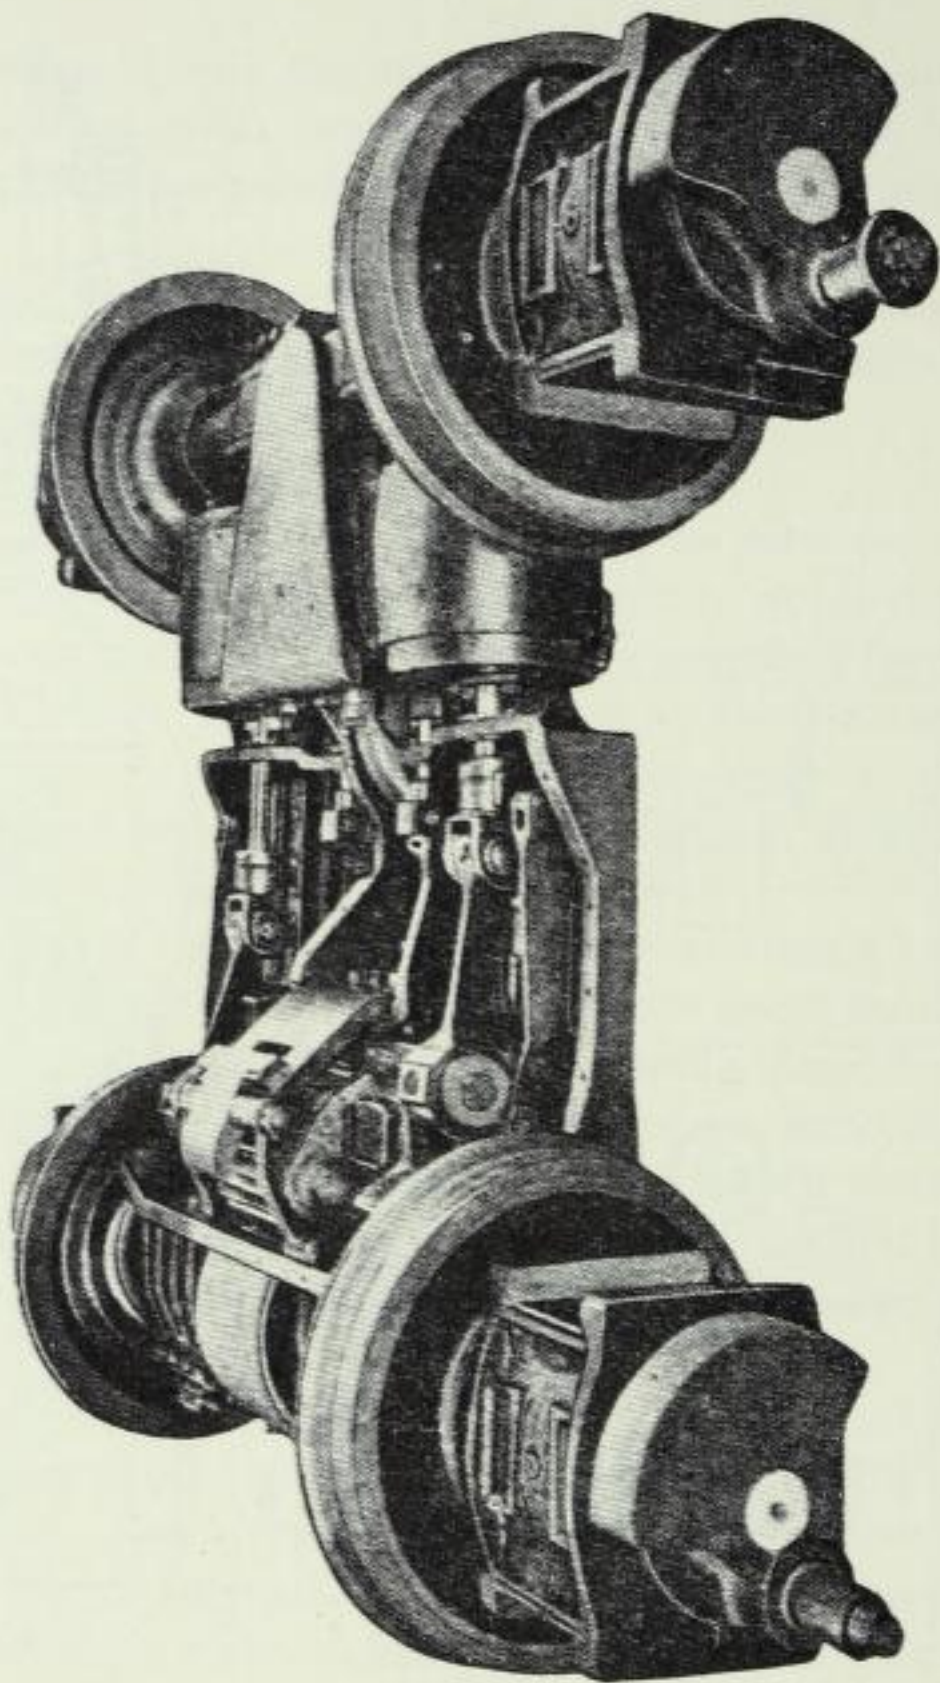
Side View of Bethlehem Auxiliary Engine.
